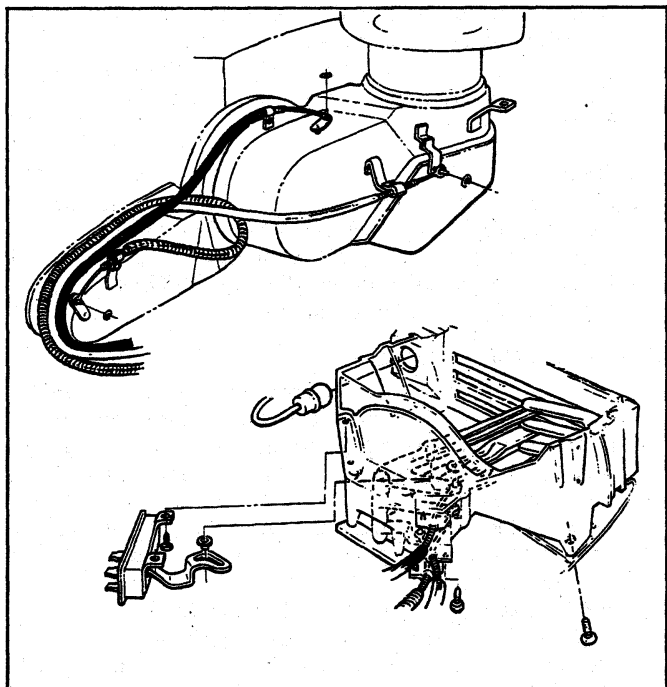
Heater Control Assembly and Cables (Chevy II)
